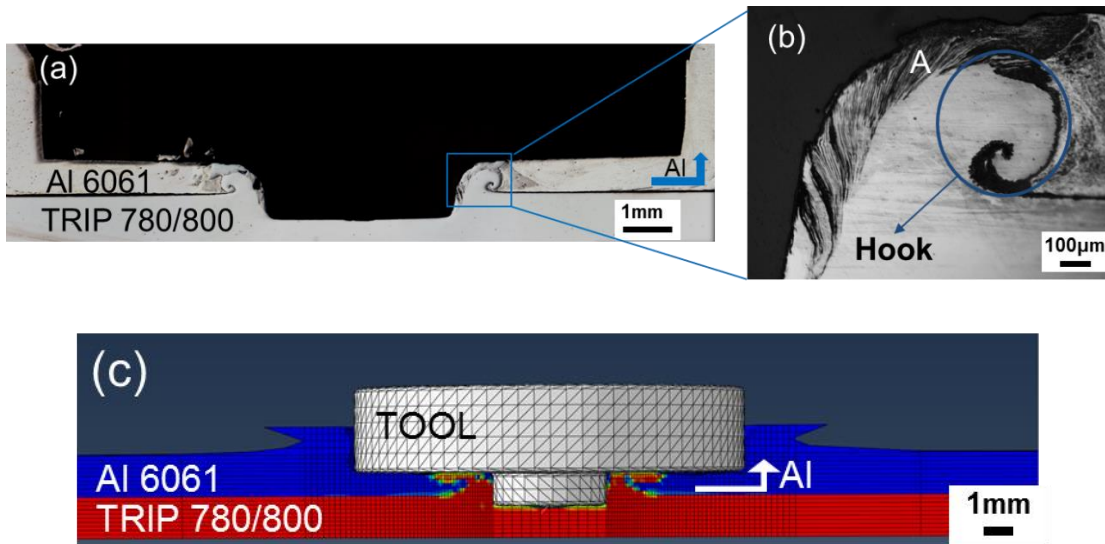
(a) Cross section view of the welding nugget (b) Geometry of the hook (c) Cross section view of the modeling result
